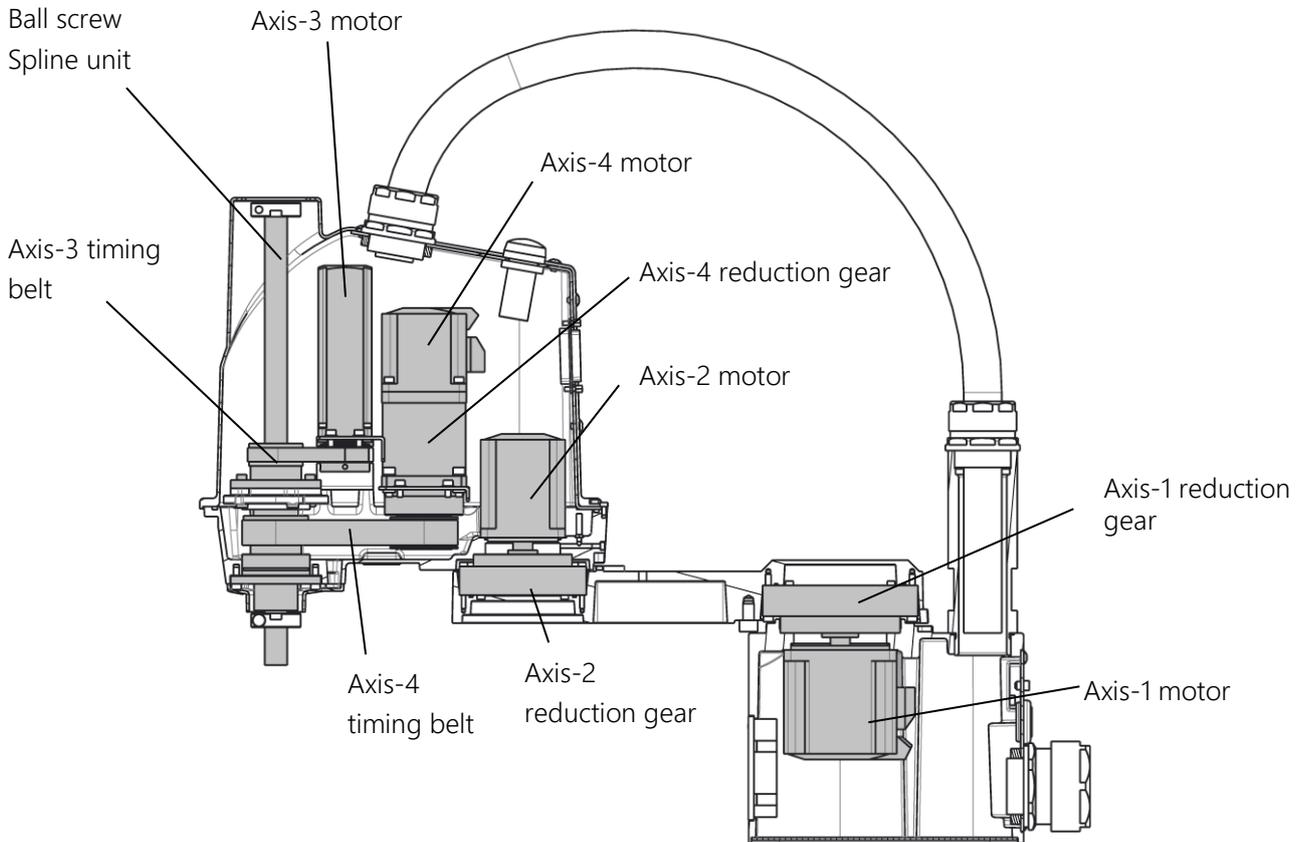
Replacement Parts that Require ② ZEROP Operation Using the Zero Setting Tool or
